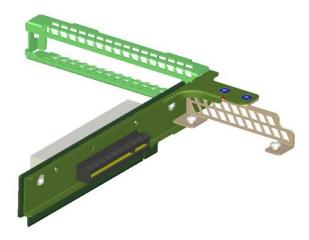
1U Butterfly Riser Card #2 Assembly – Back Side View
